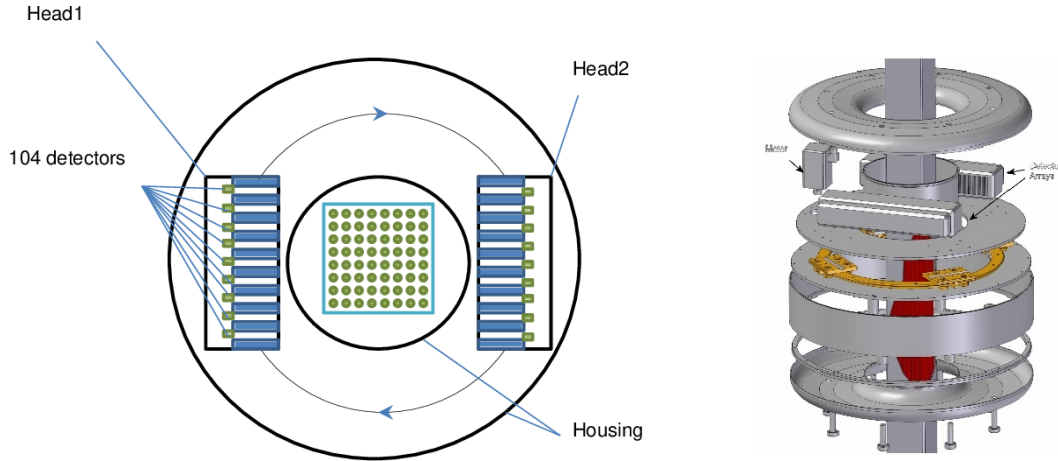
Exploded view of PGET and prototype arrangement. [59]
